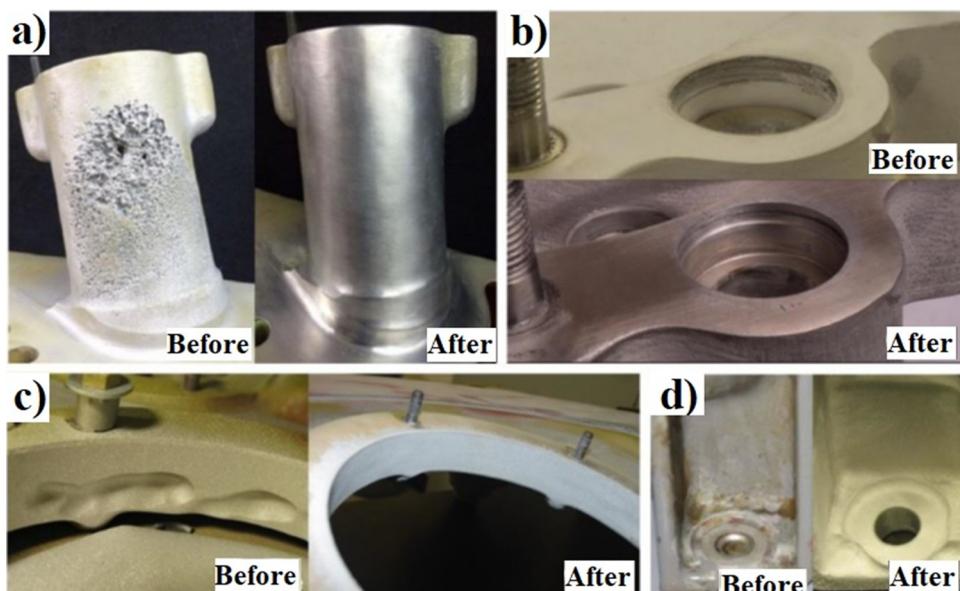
Comparing the deteriorated and restored parts by CSAM: (a) S-92 helicopter gearbox sump; (b) oil tube bores in CH47 helicopter accessory cover; (c) UH-60 helicopter gearbox sump; and (d) UH-60 rotor transmission housing [68].
